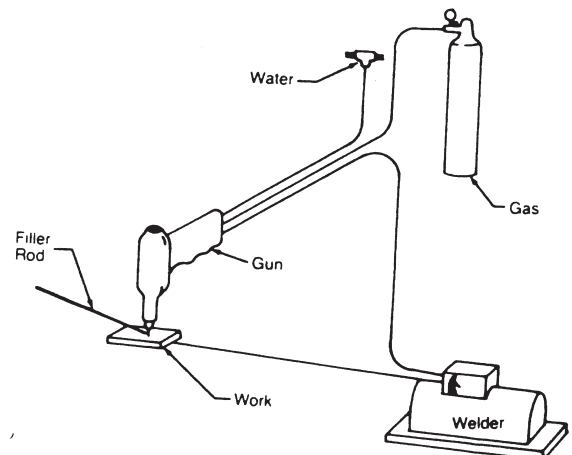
inert-gas shielded tungsten-arc welding (TIG)
